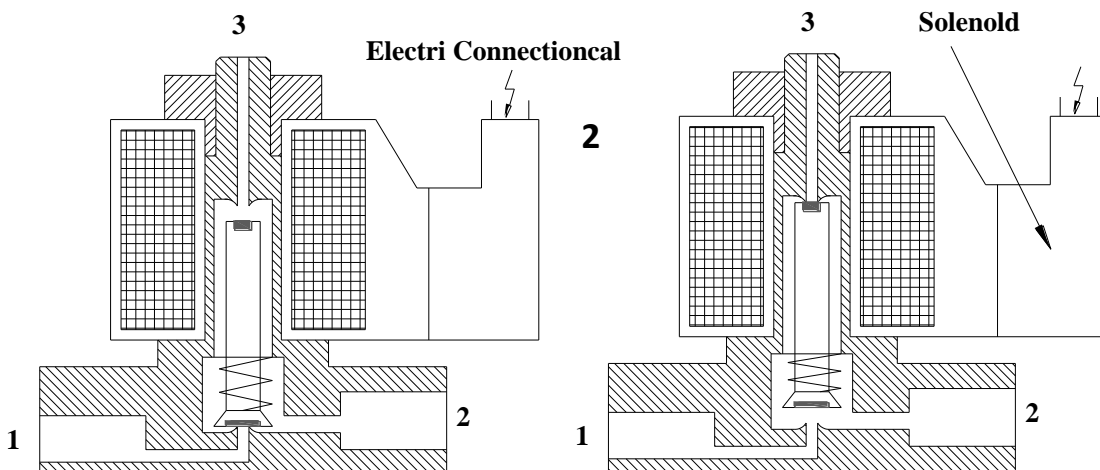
Cross sectional view of a 2/2 way solenoid operated valve
